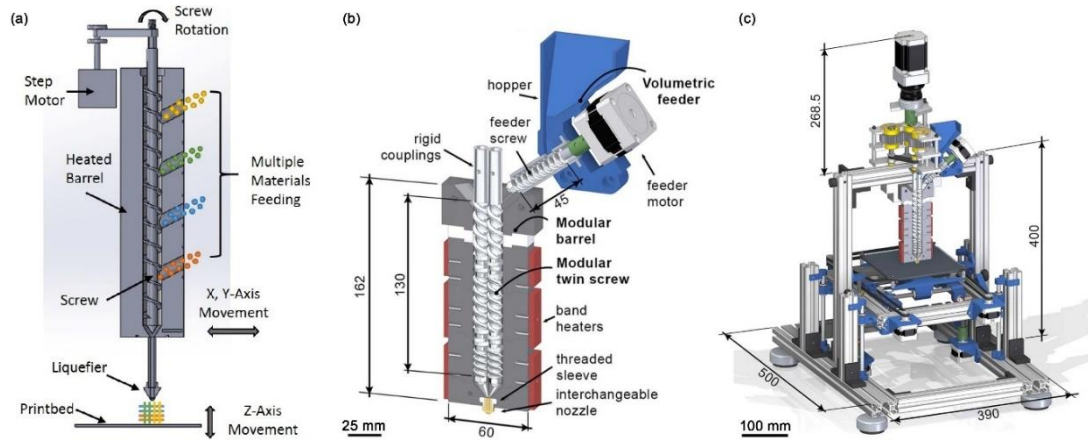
Schematic of multiple feeding port extruder (a), co-rotating twin screw extrusion head (b), and twin screw 3D printer (c) adapted from [117].
